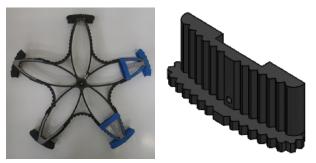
Wheel-leg used for lab testing with multiple Load Testing Feet attached (left). Close-up rendering of a single Load Testing Foot (right).
